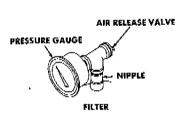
CAUTION: To ensure accurate gauge readings and avoid air entrapment, mount air release valve assembly as shown.
